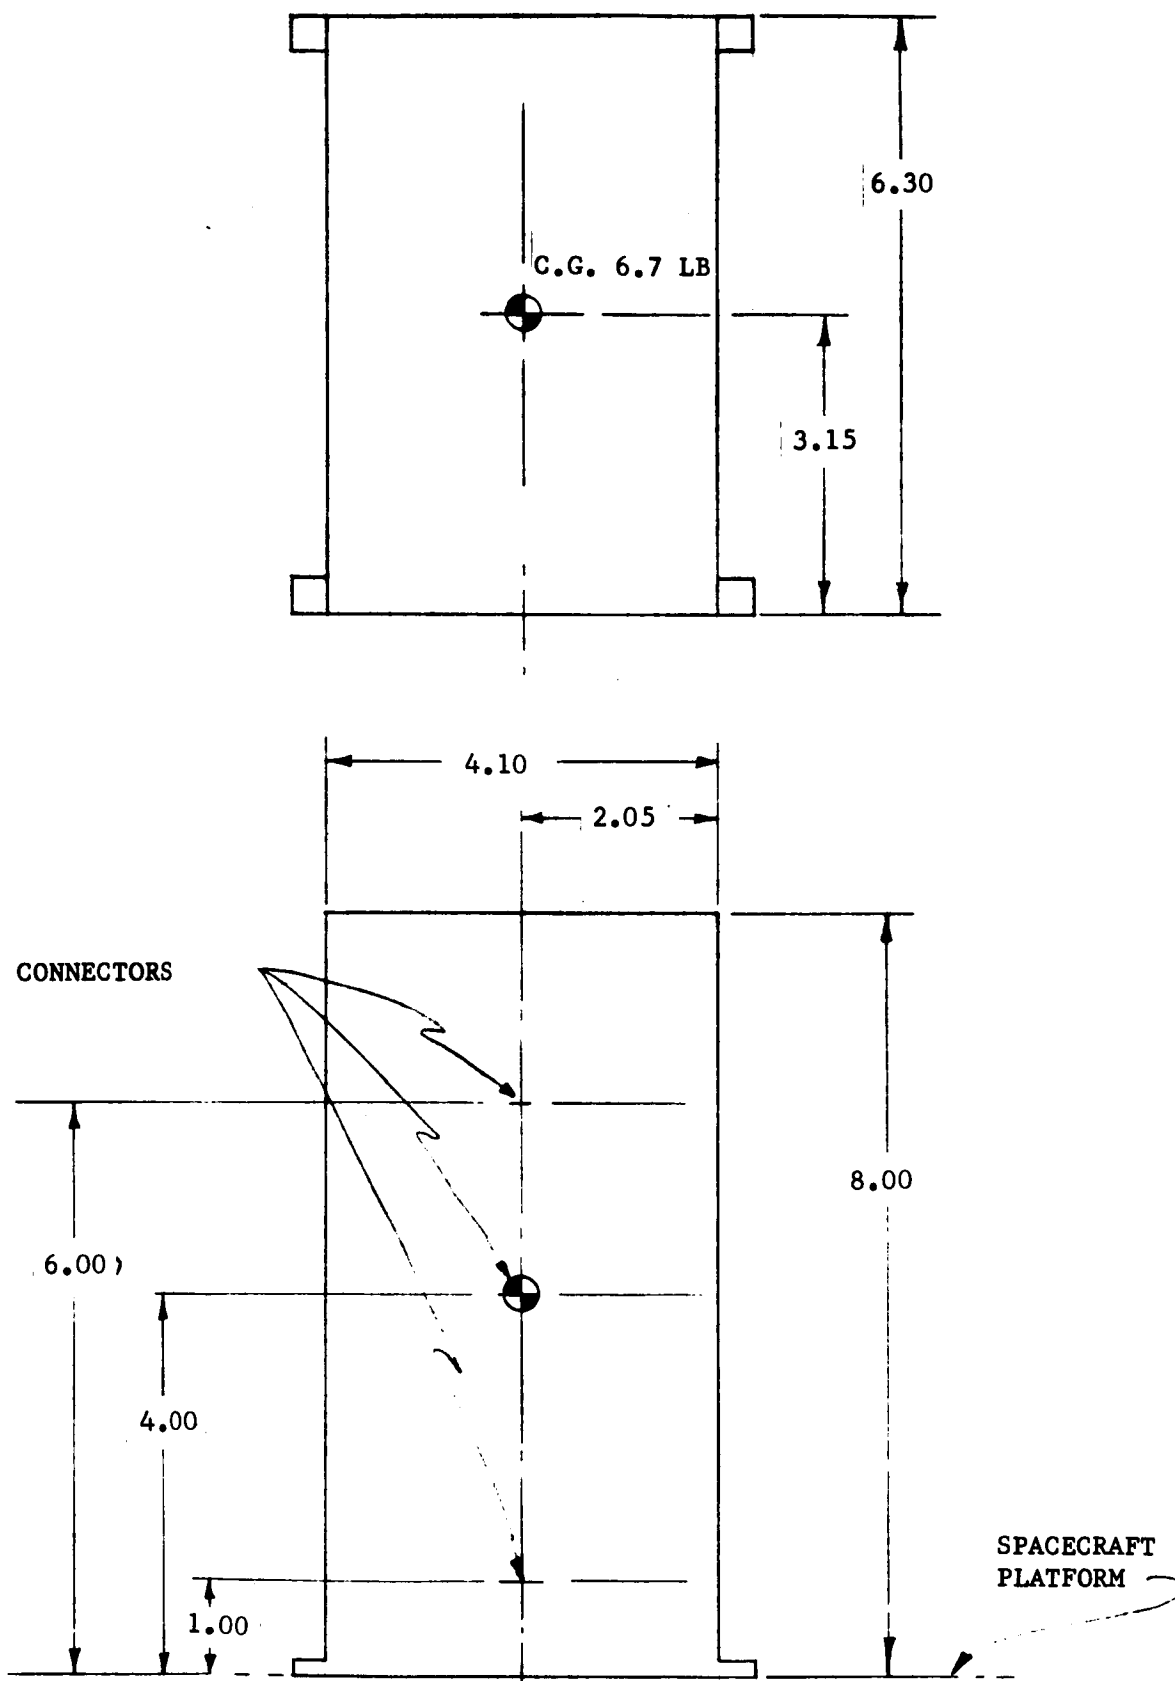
Pocket Mouse experiment interface unit (assembly 3).
